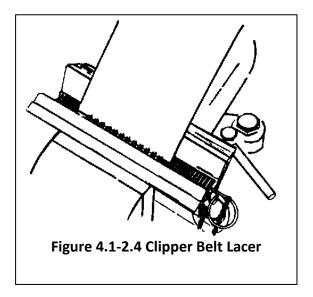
, Pit Conveyor Belt Installation Tool in Use
